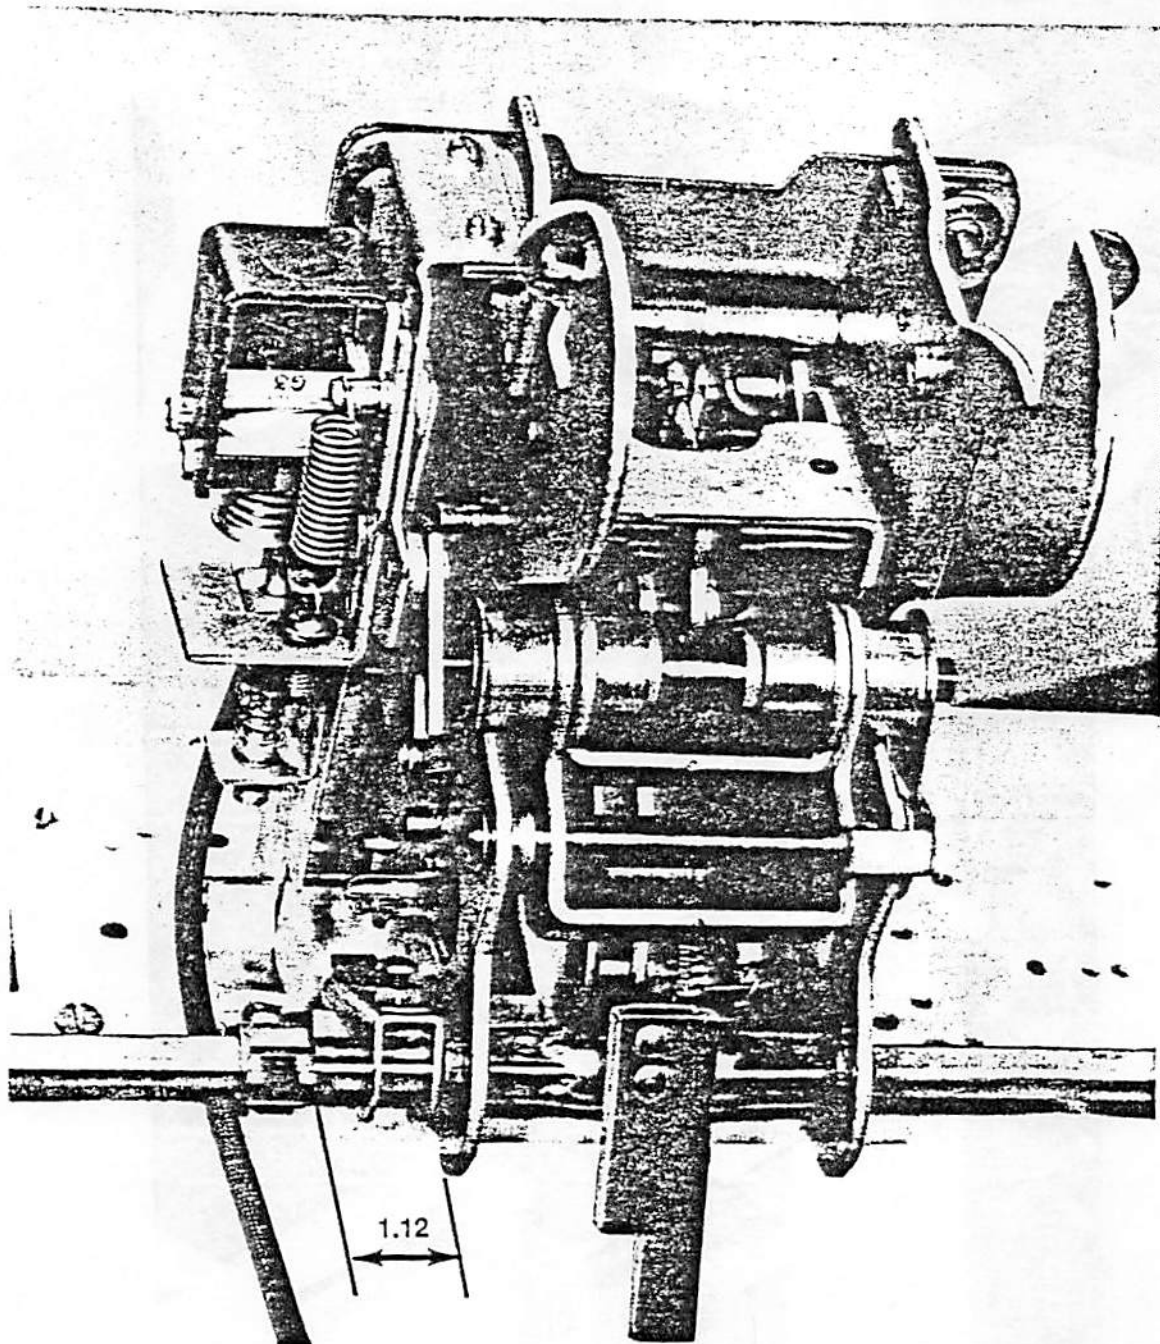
Rear view of front frame showing location of trip paddle for flux shift trip device.
